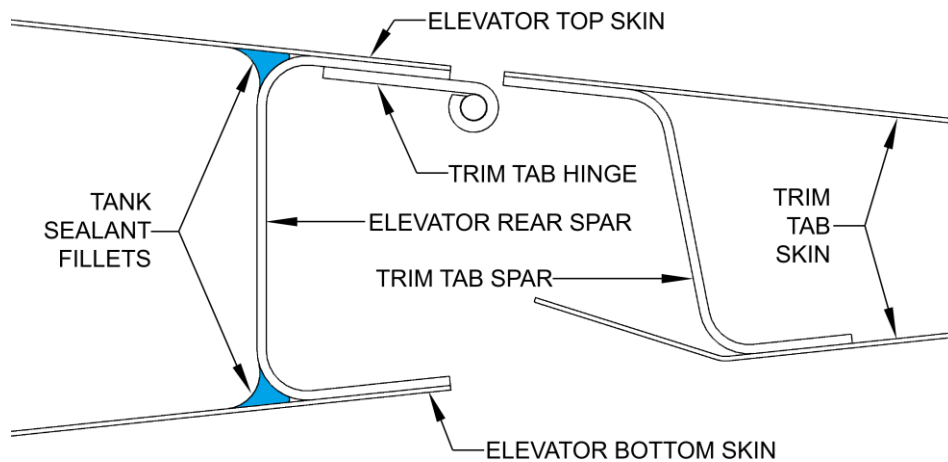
FUEL TANK SEALANT FILLET RADIUS WHERE REAR SPAR MEETS ELEVATOR SKINS
